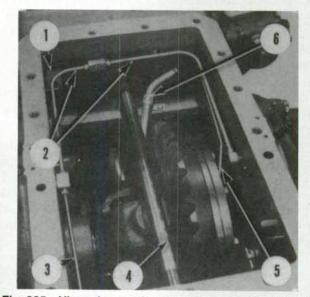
View of rear axle center housing with hydraulic lift housing removed.
